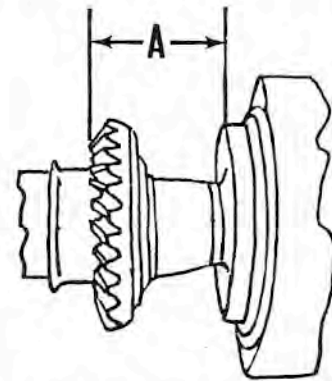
Drive gear backlash is correct if distance (A) measures 2.887 inches. Refer to text.
